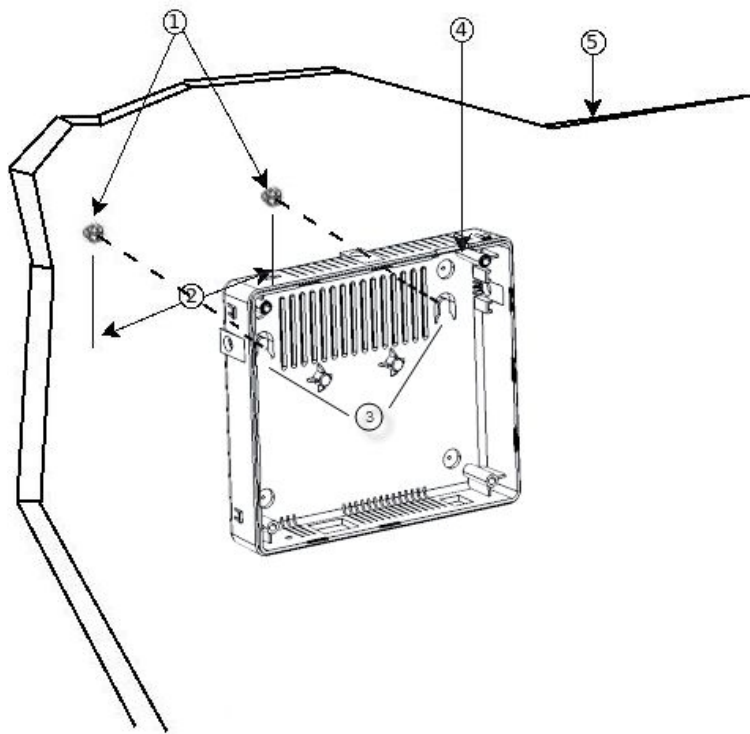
Wall-mounting features on the Teldat Connect-4GE router
